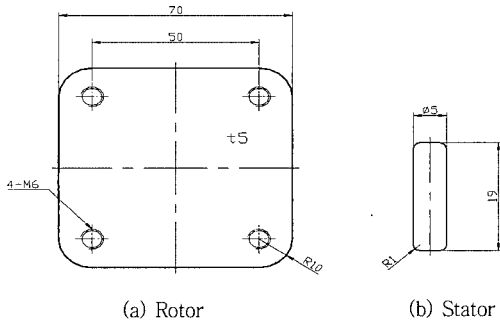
Shapes and dimensions of test specimens. (unit : mm).
